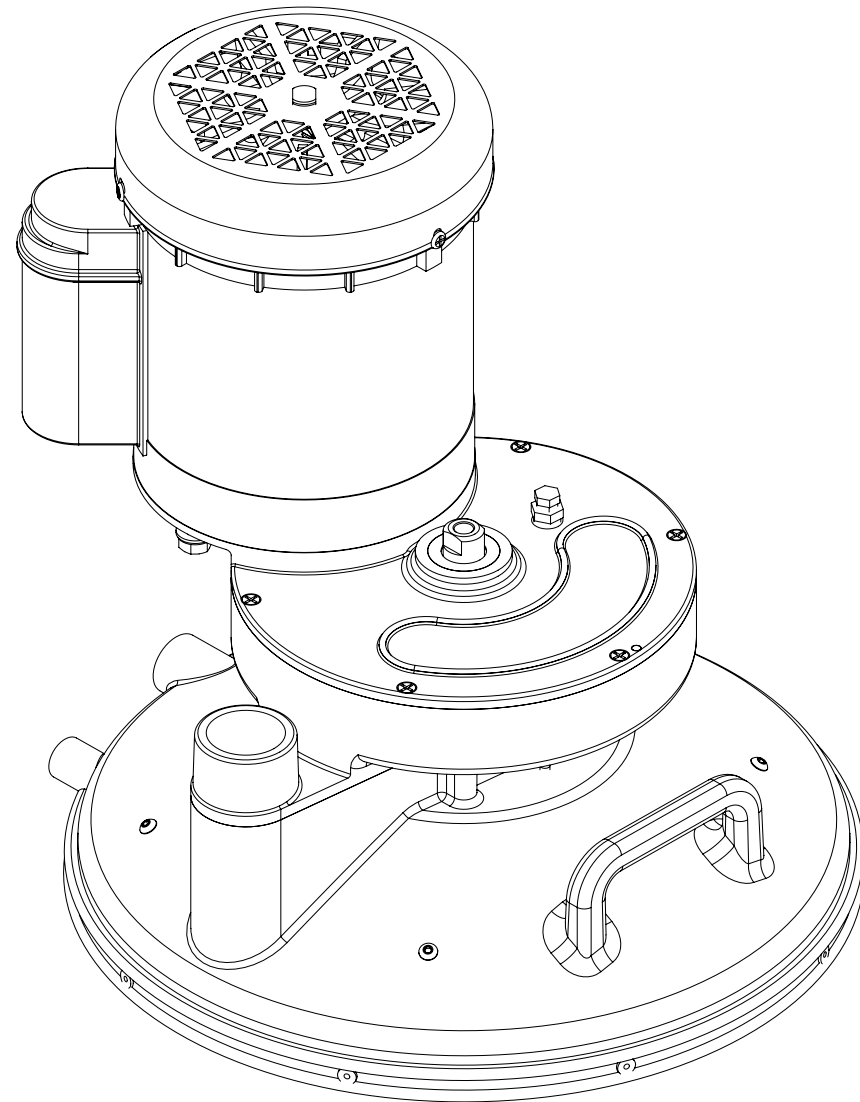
Base and Drive Train Assembly - View 1 of 2
